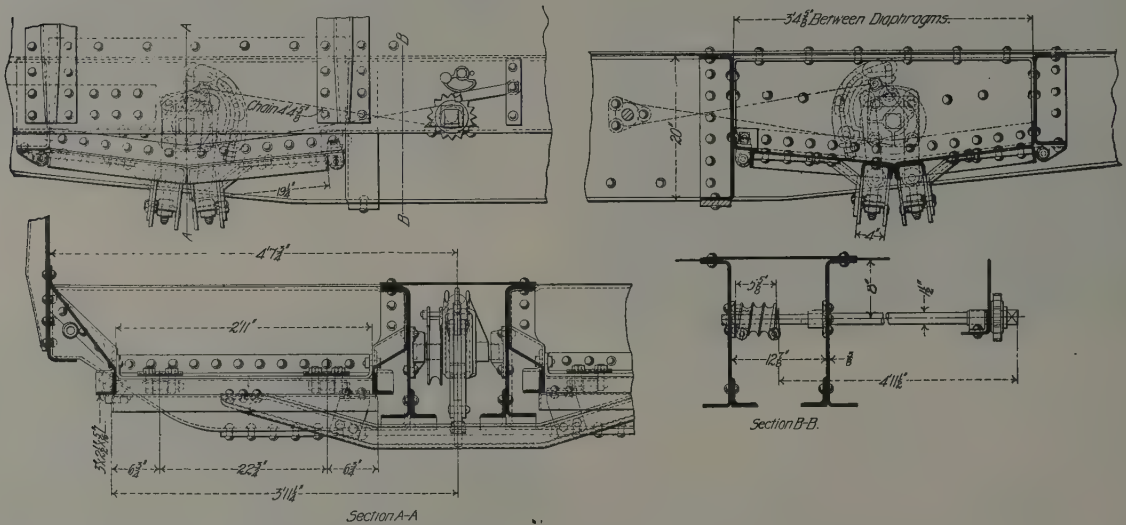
Lind Drop Door Apparatus for All-Steel Hopper Bottom Gondola Car. Pressed Steel Car Company.
